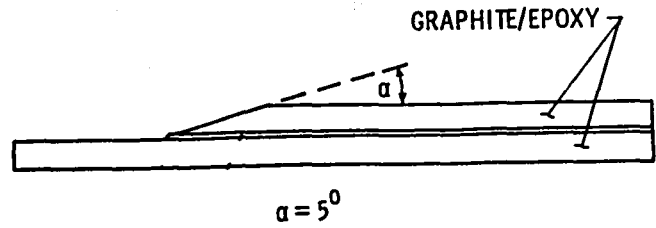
Tapered-Cracked-Lap-Shear Specimen
